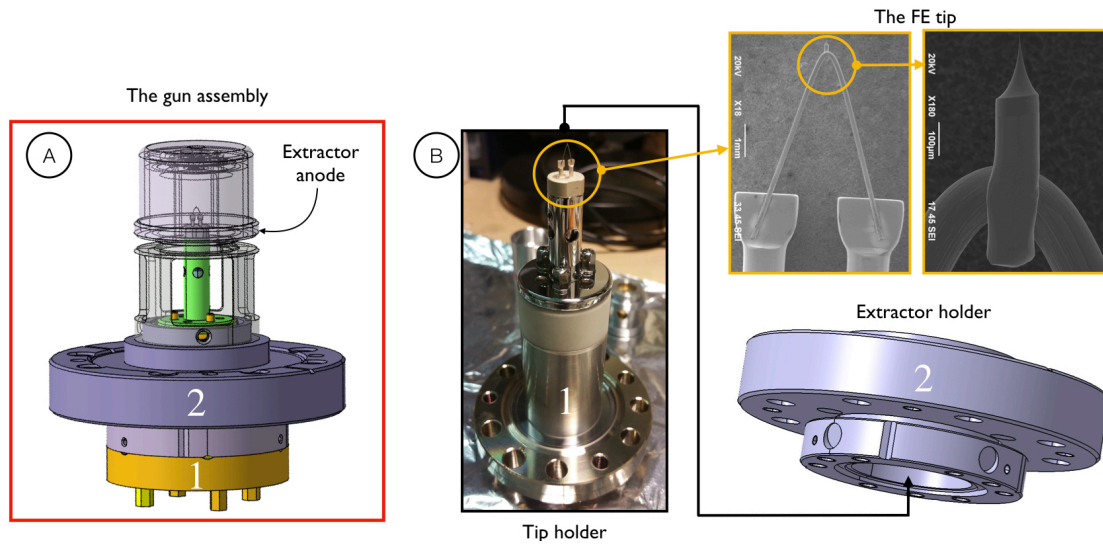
Enlargement of the gun assembly area. A- General CAD drawing showing the tip holder (1) and the extractor holder (2) used to fix the extractor anode. B- Picture of the HF2000 tip holder. In the yellow squares are reported the SEM images of the FE tip. As shown in B, the tip holder will be connected to the extractor holder through a DN-CF40 connector.
